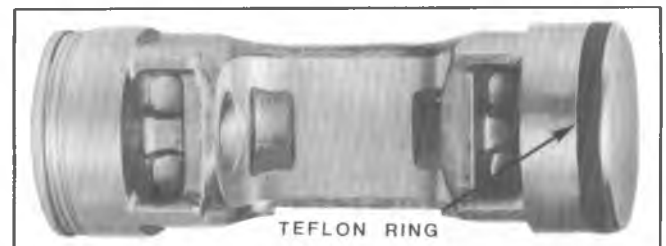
Teflon A-6 Piston Ring Installed in Piston Groove
